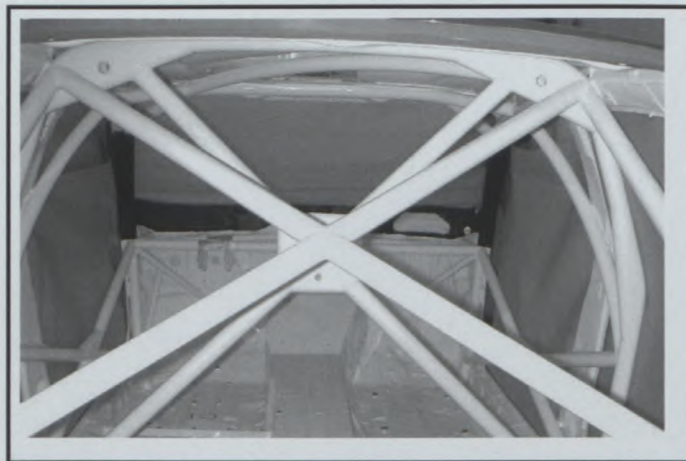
REAR SUPPORT TO FLOOR LOWER
